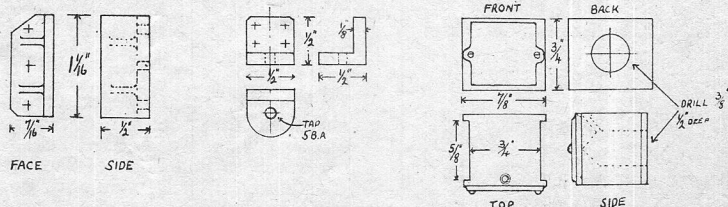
Horncheeks, spring hanger brackets, and axleboxes
